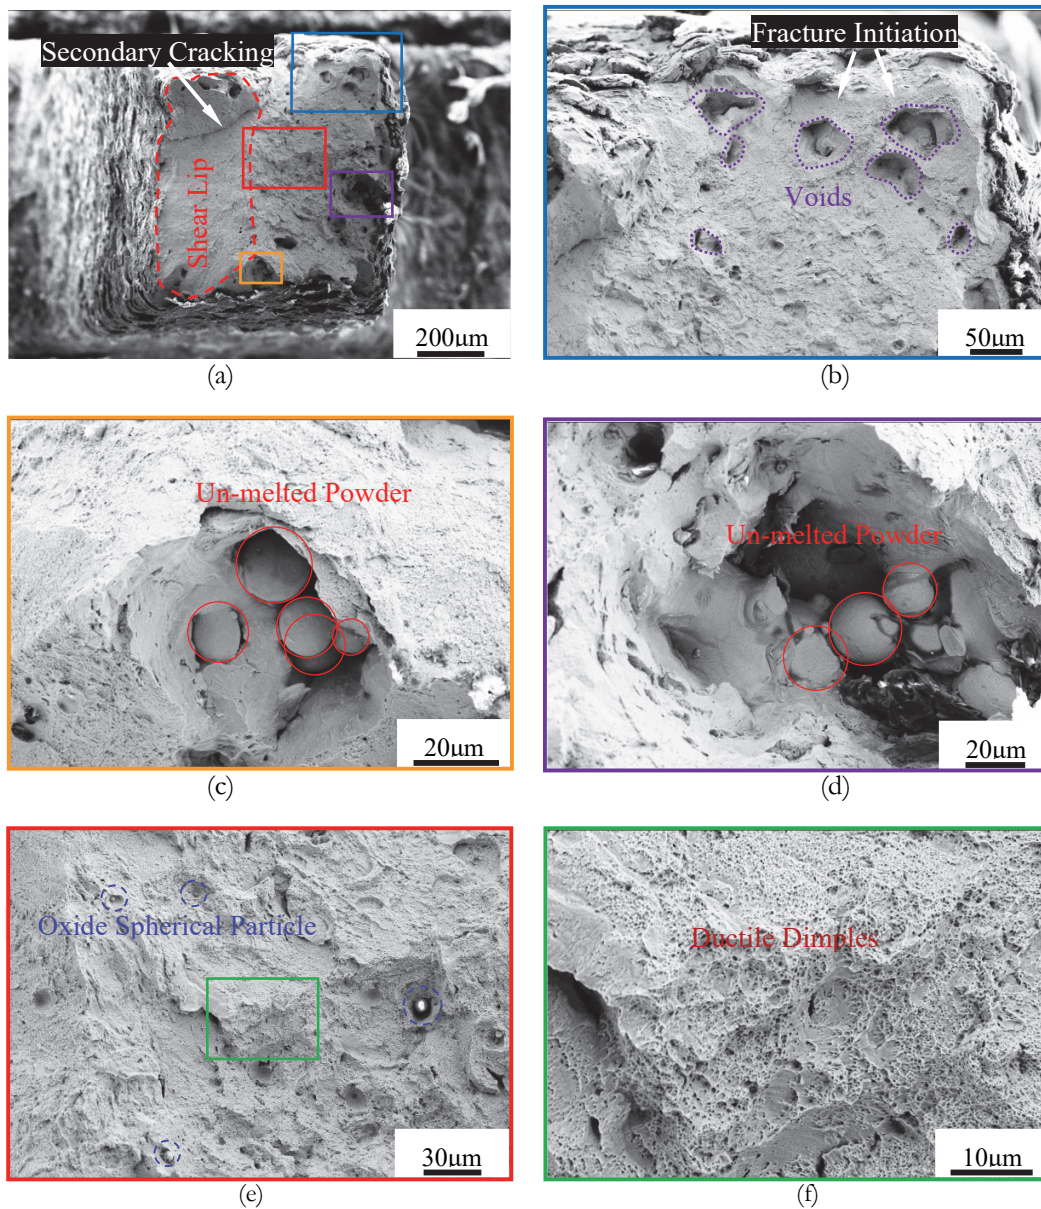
Fractography of (a) whole fracture surface, (b) fracture initiation site, (c) and (d) un-melted powder defects, (e) ductile failure and (f) close-up ductile dimples for SLM manufactured SS316.
